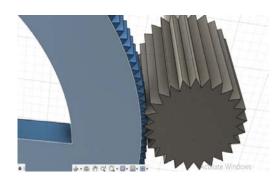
Toothed sector-pinion gear in Autodesk Fusion
